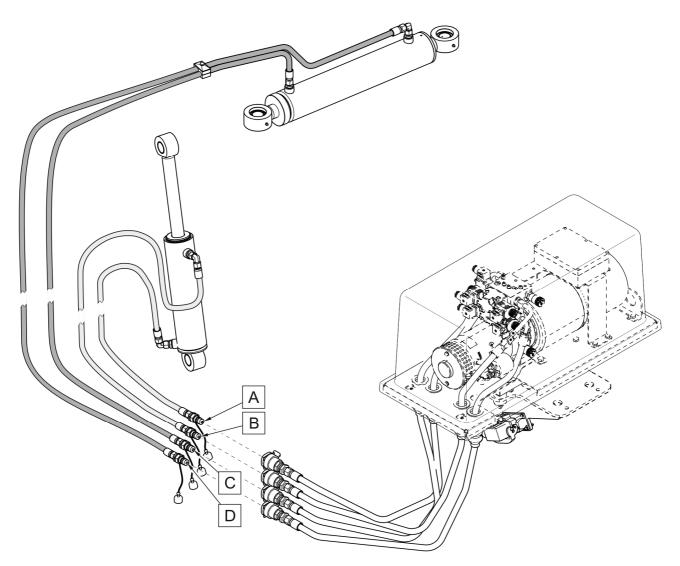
Connect the plough hydraulic system to the Power-Pack
